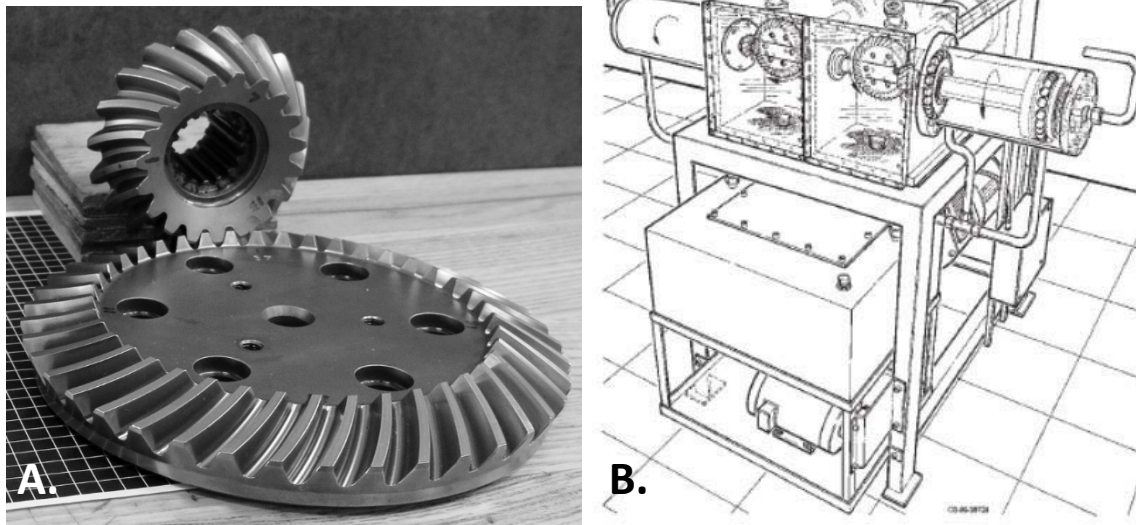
(A) Example spiral bevel gear pair. (B) NASA spiral bevel gear test rig.
